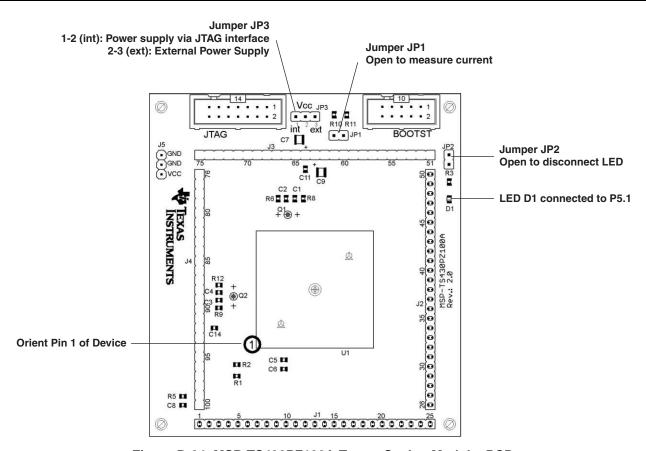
MSP-TS430PZ100A Target Socket Module, PCB
